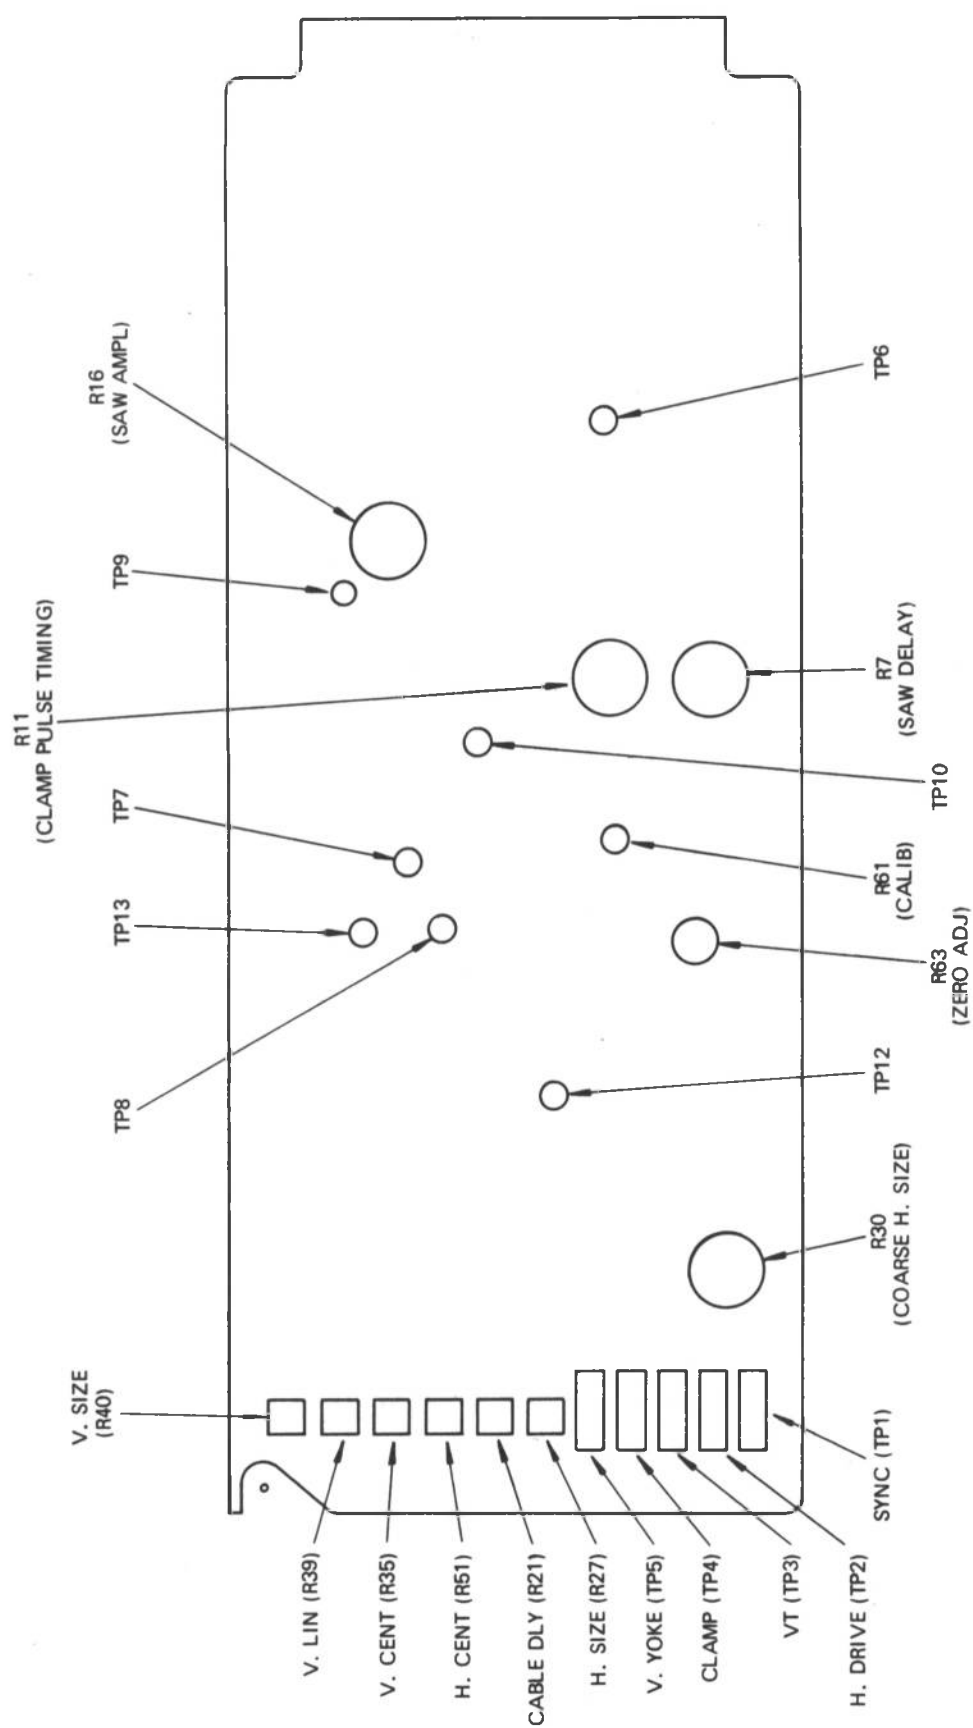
Deflection Board 8455801 Test Points and Adjustable Controls (S/N 8-0001 and ON)
